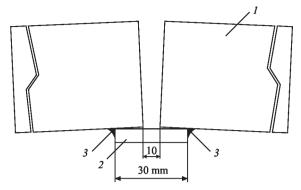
Scheme of assembling specimens for welding: 1 — side walls of a narrow gap; 2 — remaining backing plate; 3 — welds for welding-on the backing plate to the side walls
